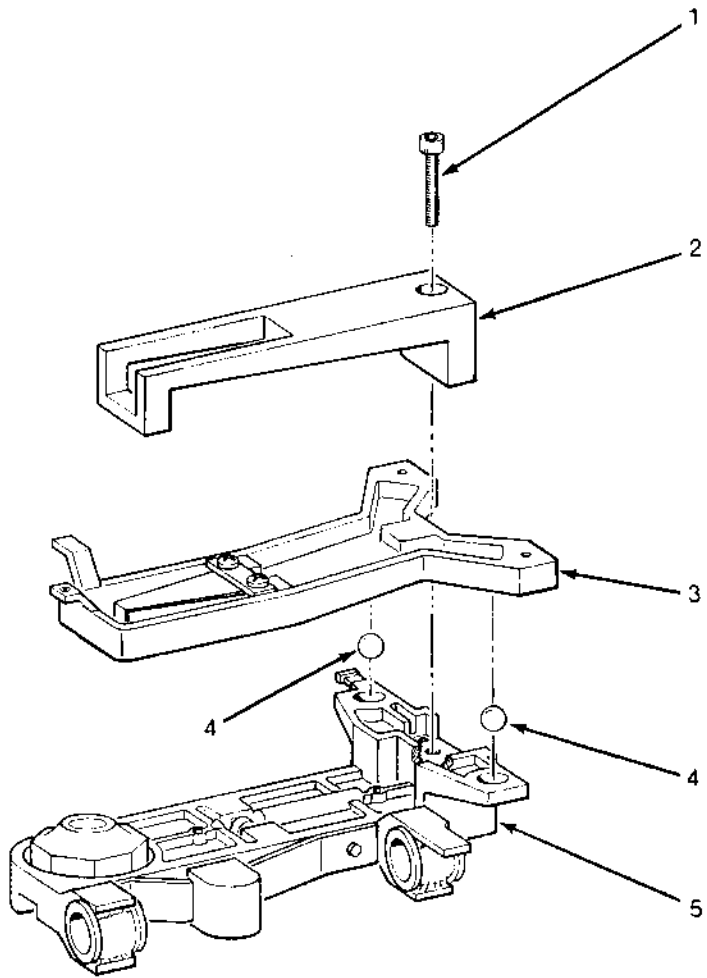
TOP PLATE ASSEMBLY, EXPLODED VIEW
